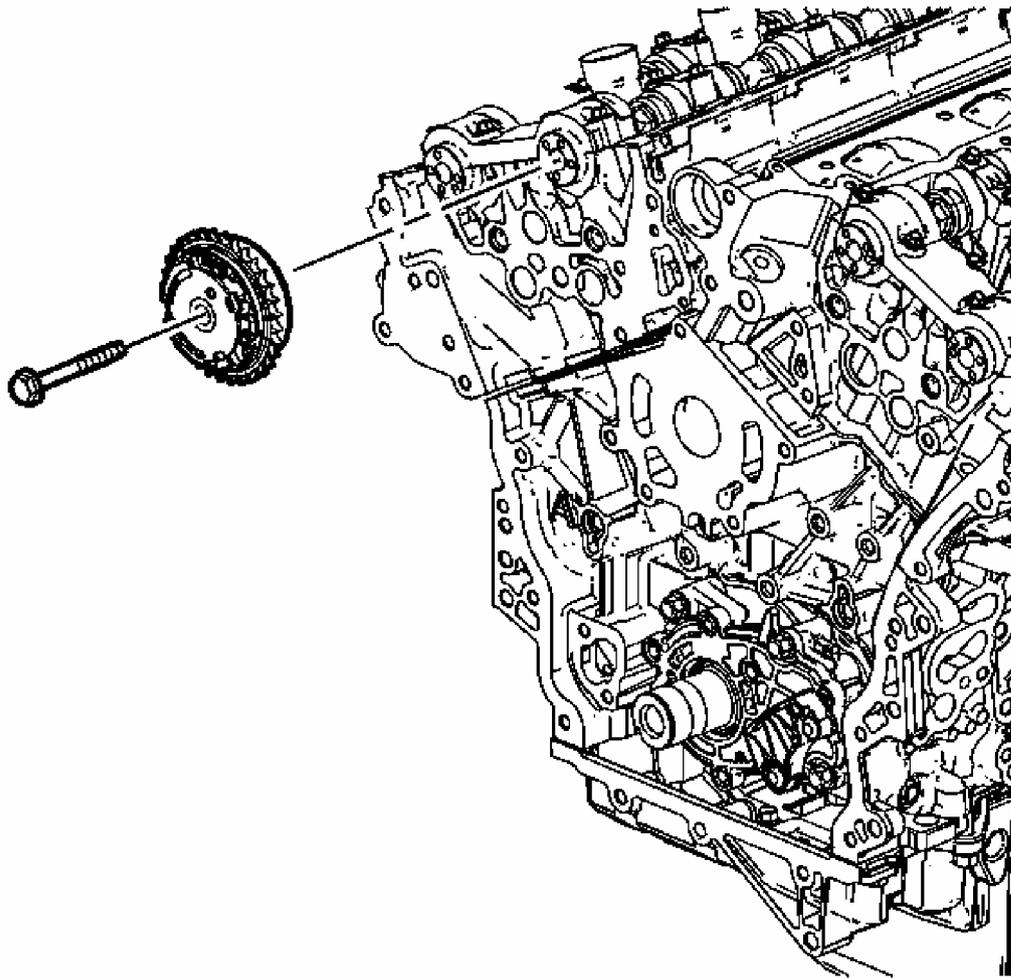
View Of Camshaft Position (CMP) Actuator - Bank1 Intake
